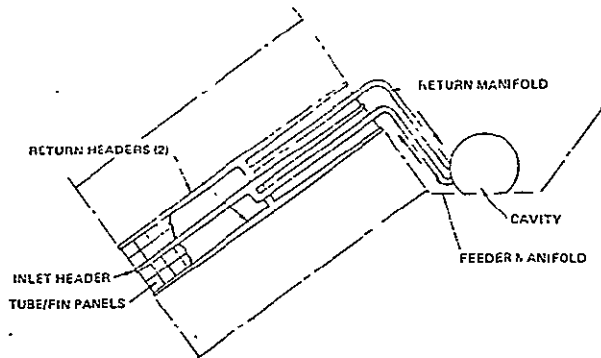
Original Panel Arrangement Showing Typical Feeder Path to Center-Fed Headers
